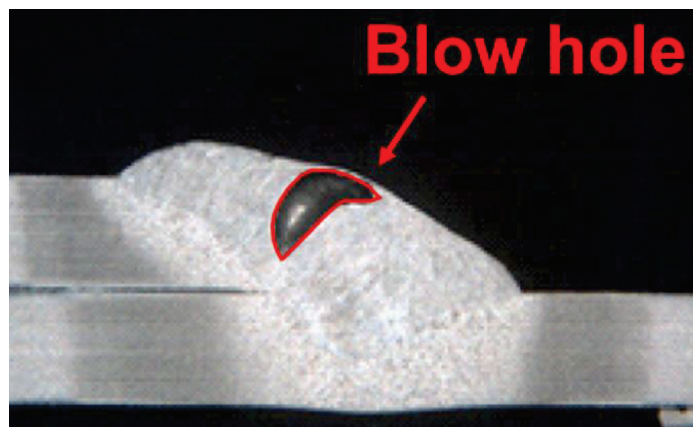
Blowhole in weldmetal of lap fillet joint using galvanized steel sheets.
